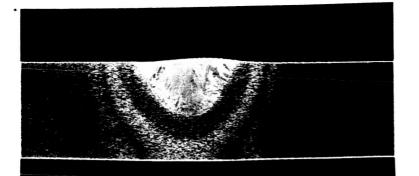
Efficiency of Metal Foil Backing Materials - Macrosections of Bead-on-Plate Welds in 5/16 INCH 2014-T6 Plate (3X)
